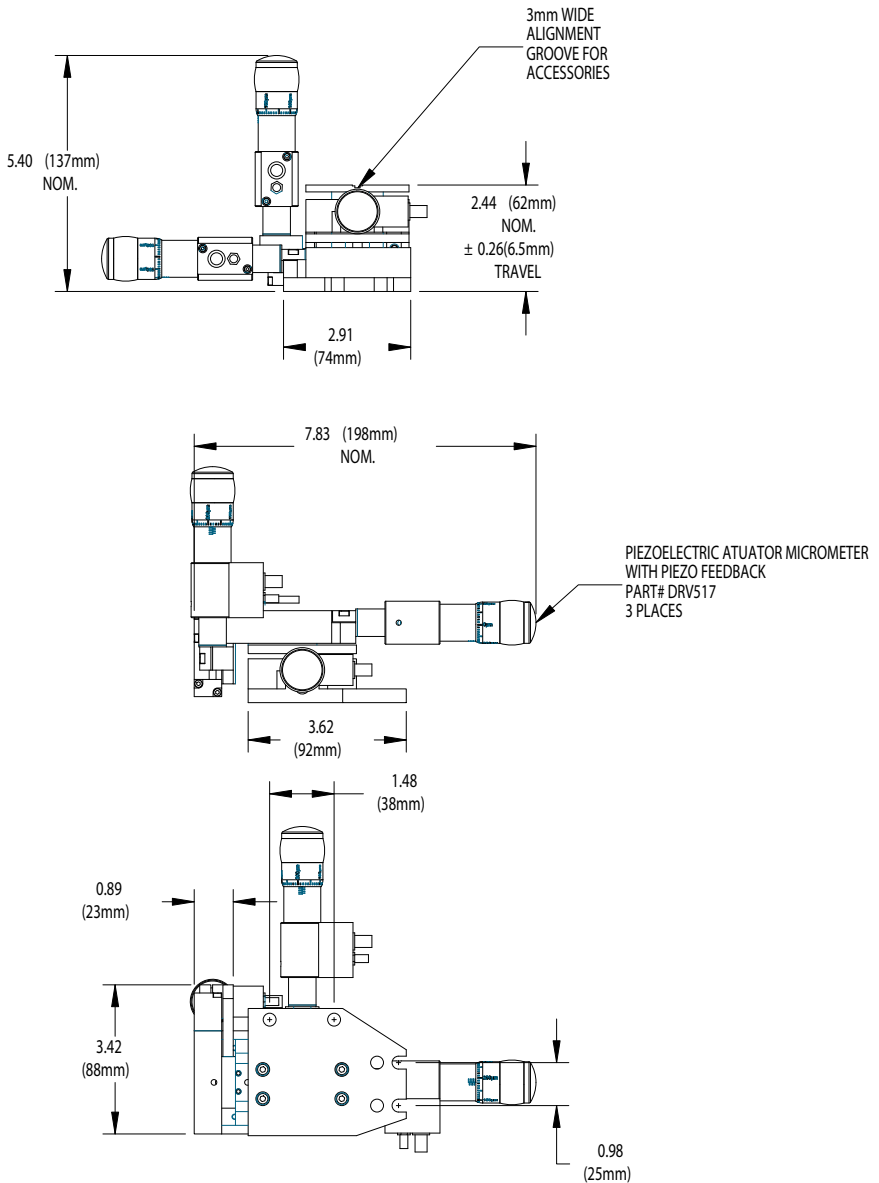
RB13MP Micrometer RollerBlock Dimensions
